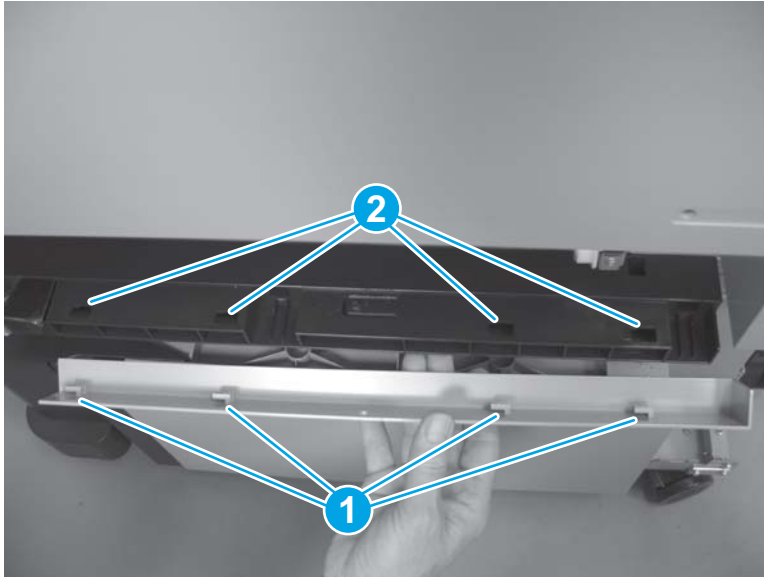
Remove the 1x500 and 3x500 upper front face cover
